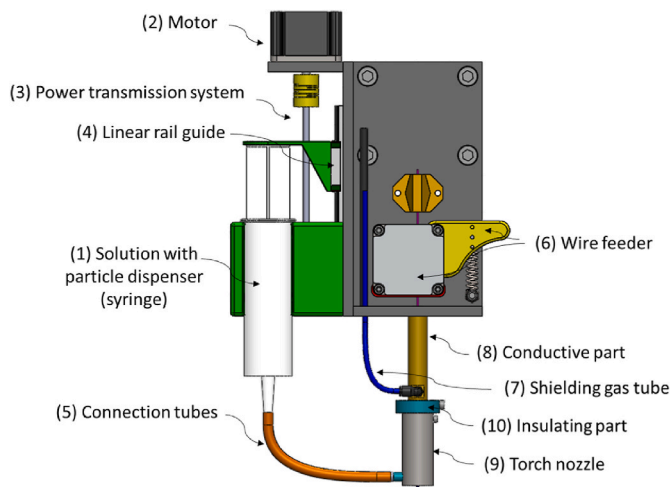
Illustration of each component in the tailored welding/WAAM torch.
